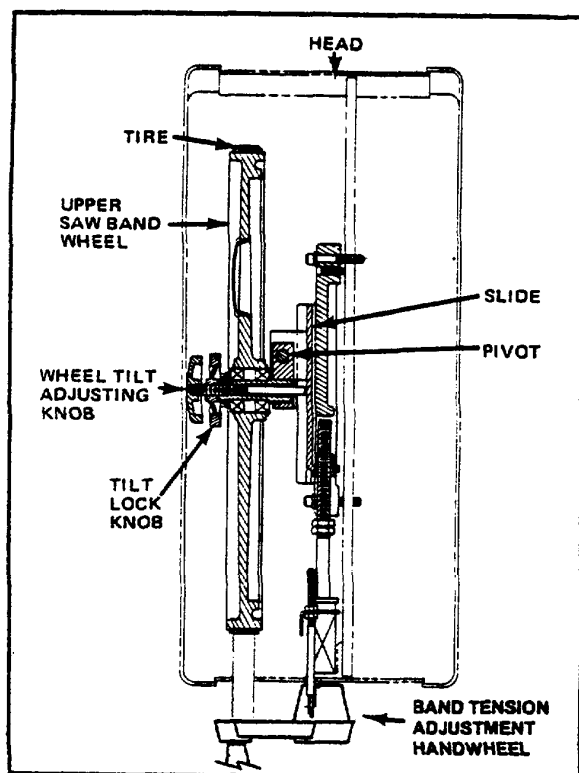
WHEEL TILT ADJUSTMENT -SIDE VIEW.
